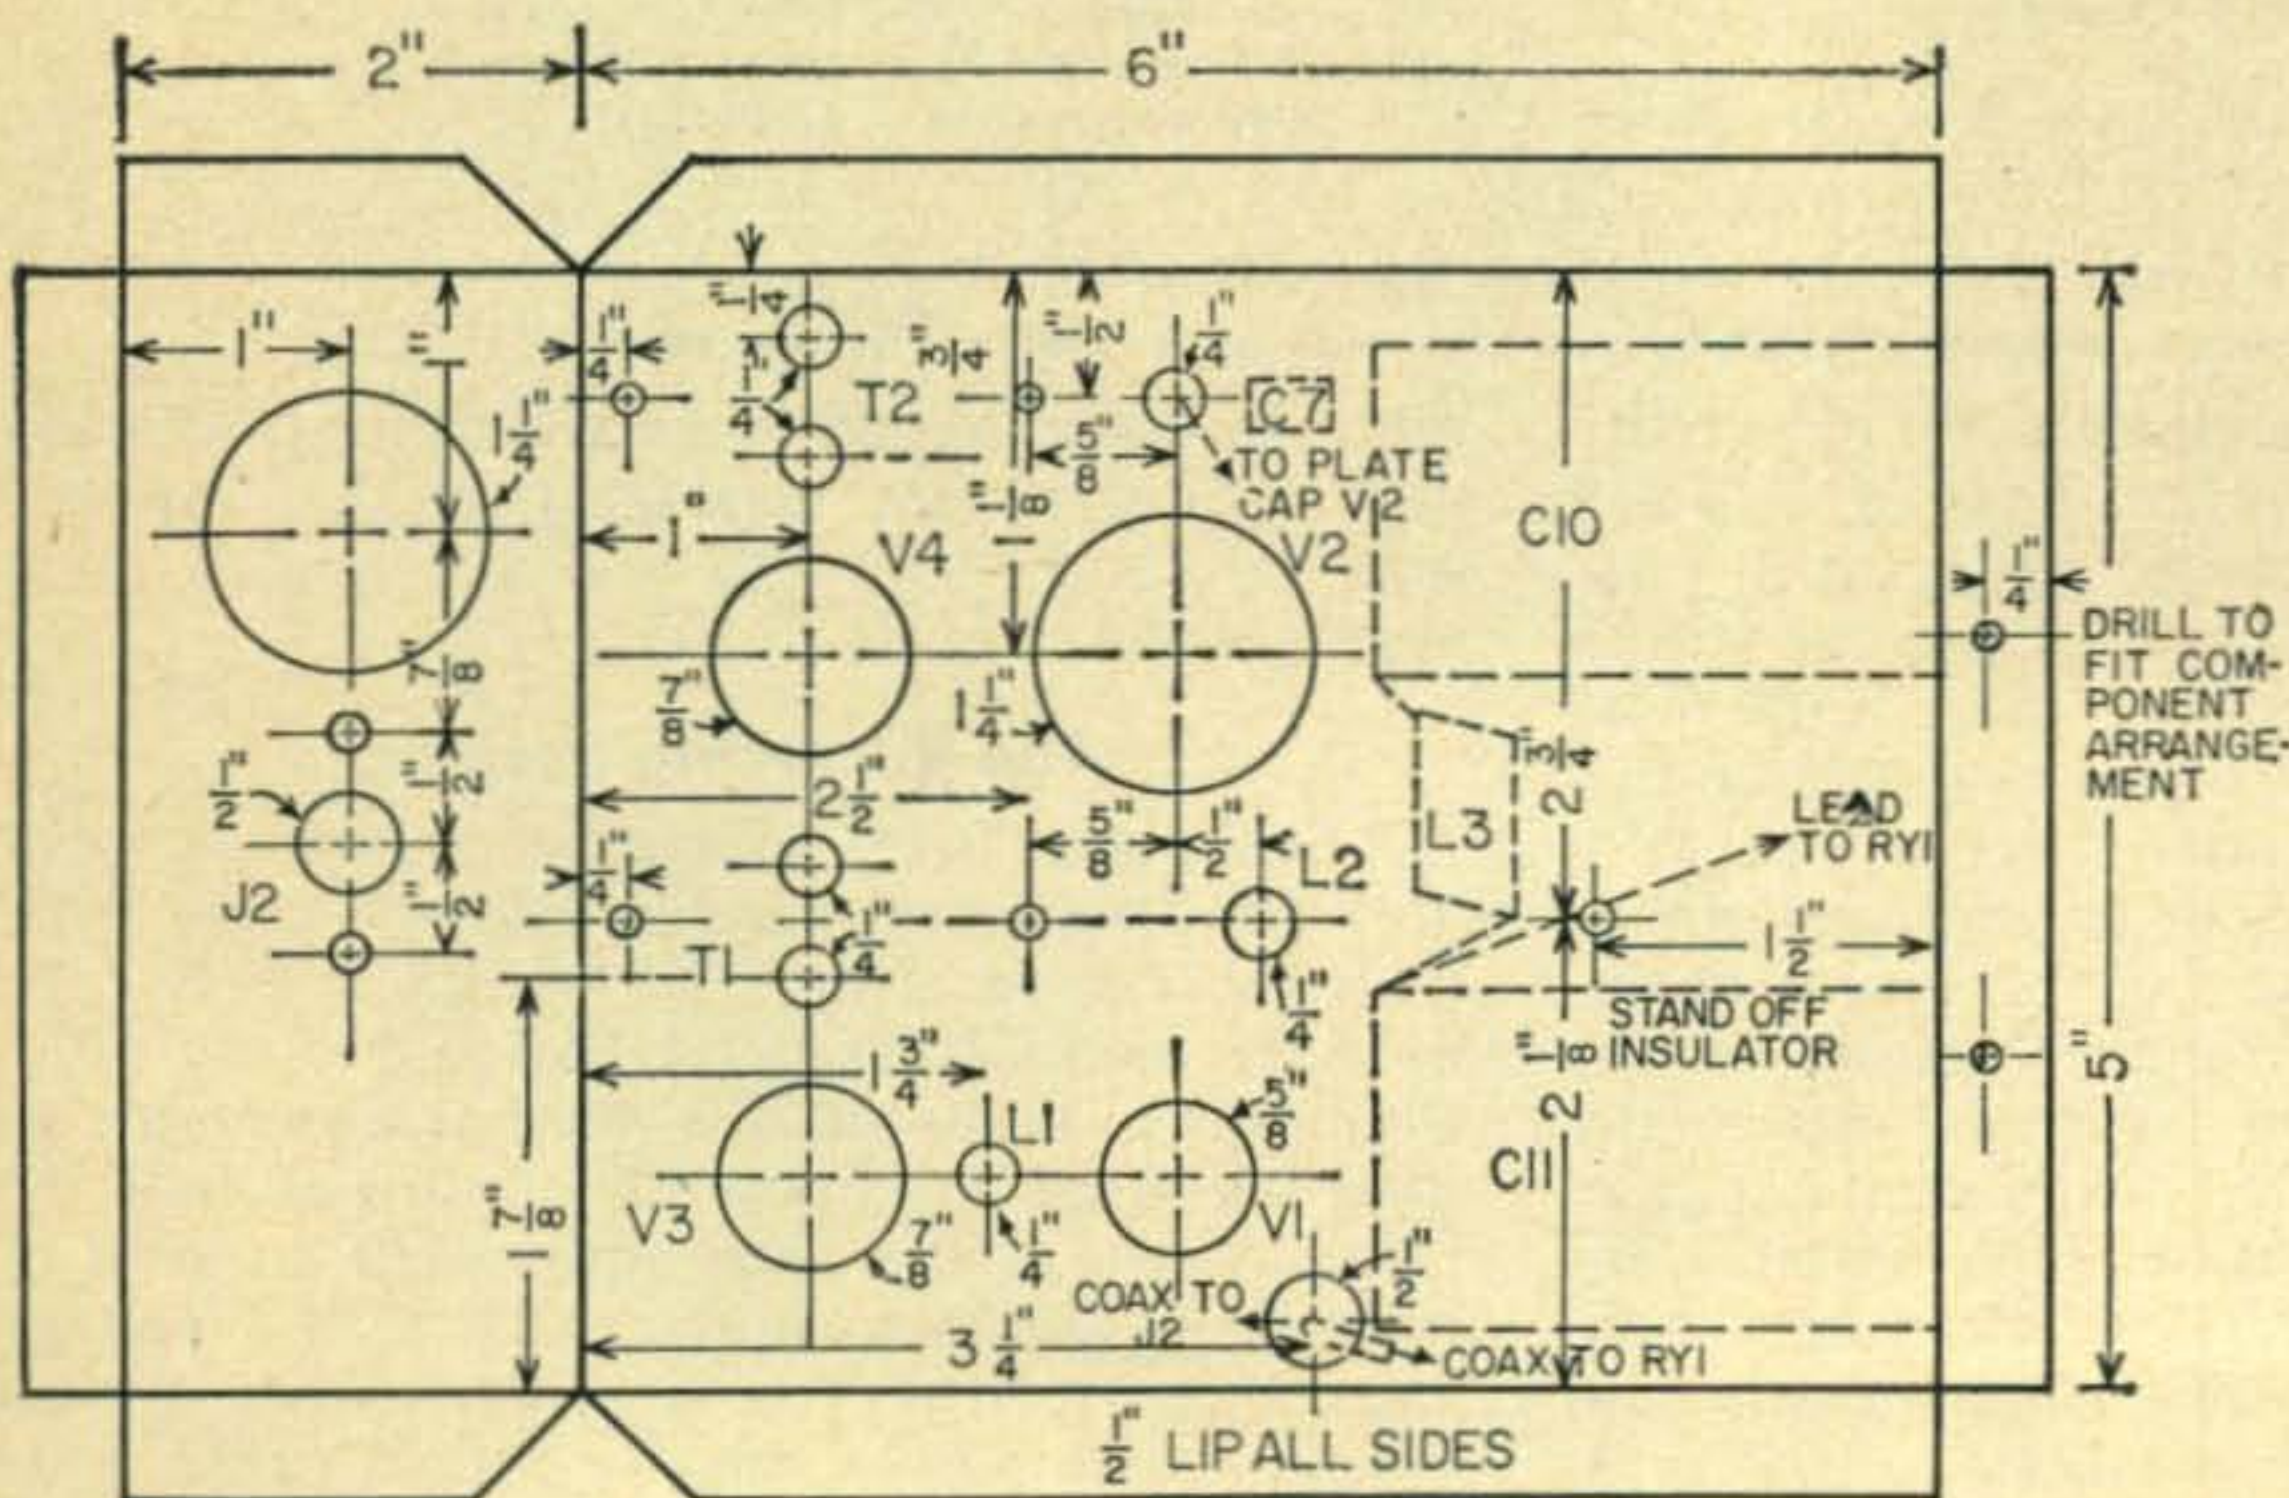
Chassis layout. The dotted lines indicate the component location. All holes with no dimension marking are to be drilled to pass a 6/32 screw. The two holes on the right lip are to be positioned to clear all components.
